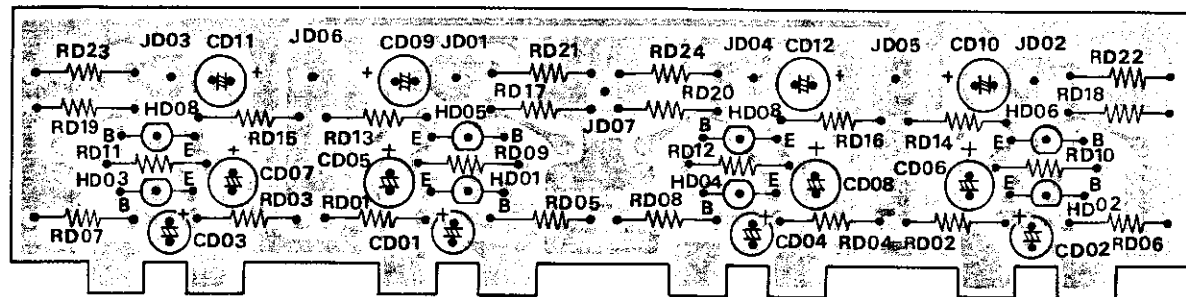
Tone Amplifier Assembly PD01 Component Locations
